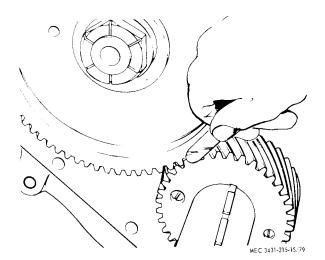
Checking crankshaft and camshaft gear spacing.
